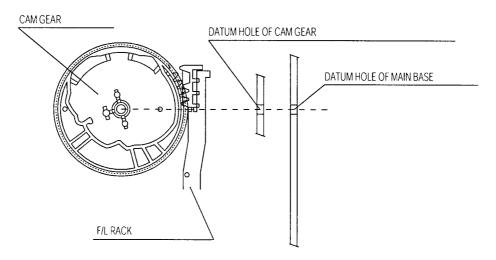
DATUM POSITION OF F/L RACK & CAM GEAR
